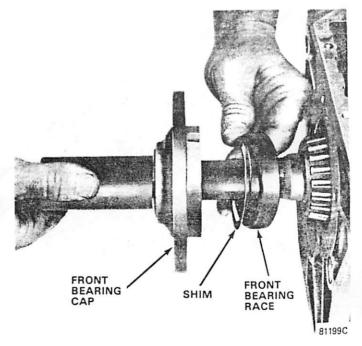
B-12 Front Bearing Cap. Shim and Race Removal/Installation
